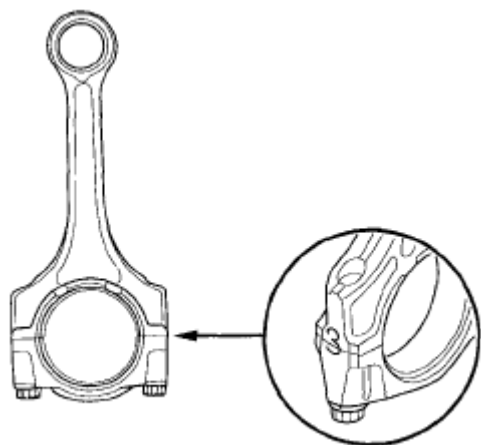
Identifying Connecting Rod Big End Bore Code Locations
